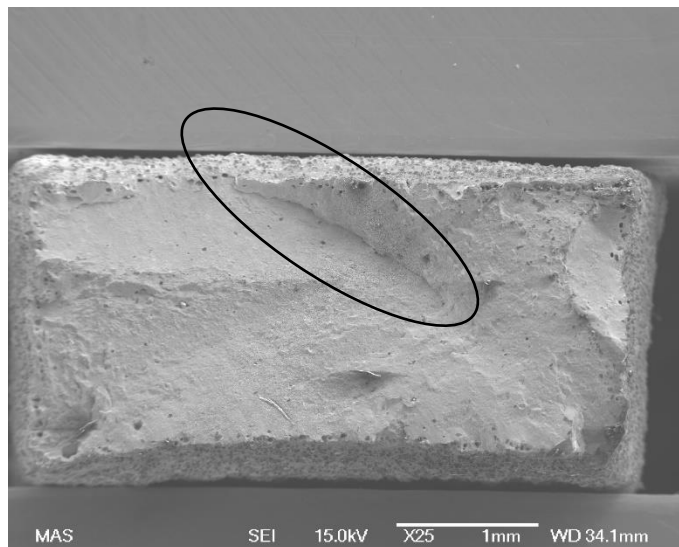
98: BP3 HT3 Fracture Surface
